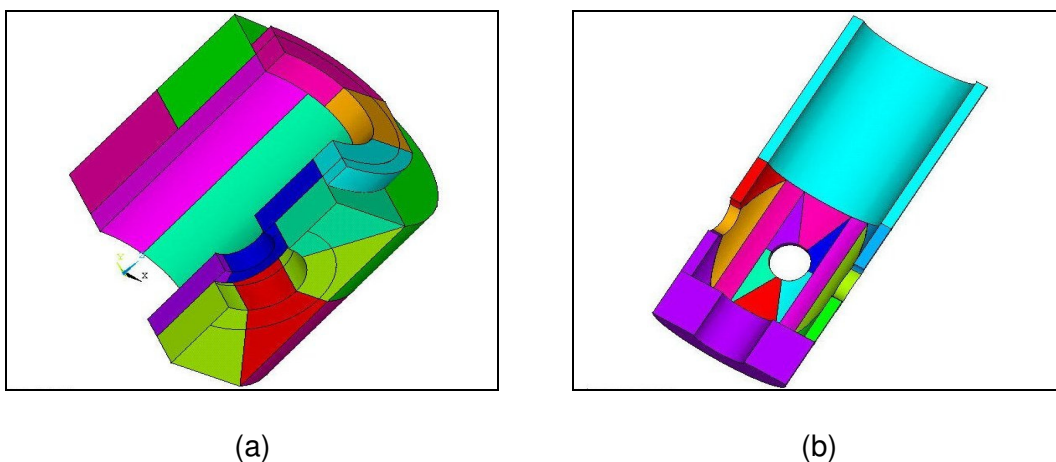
Division of welding model in small volumes: (a) Detail of internal block and external block; (b) Detail of collet body.
